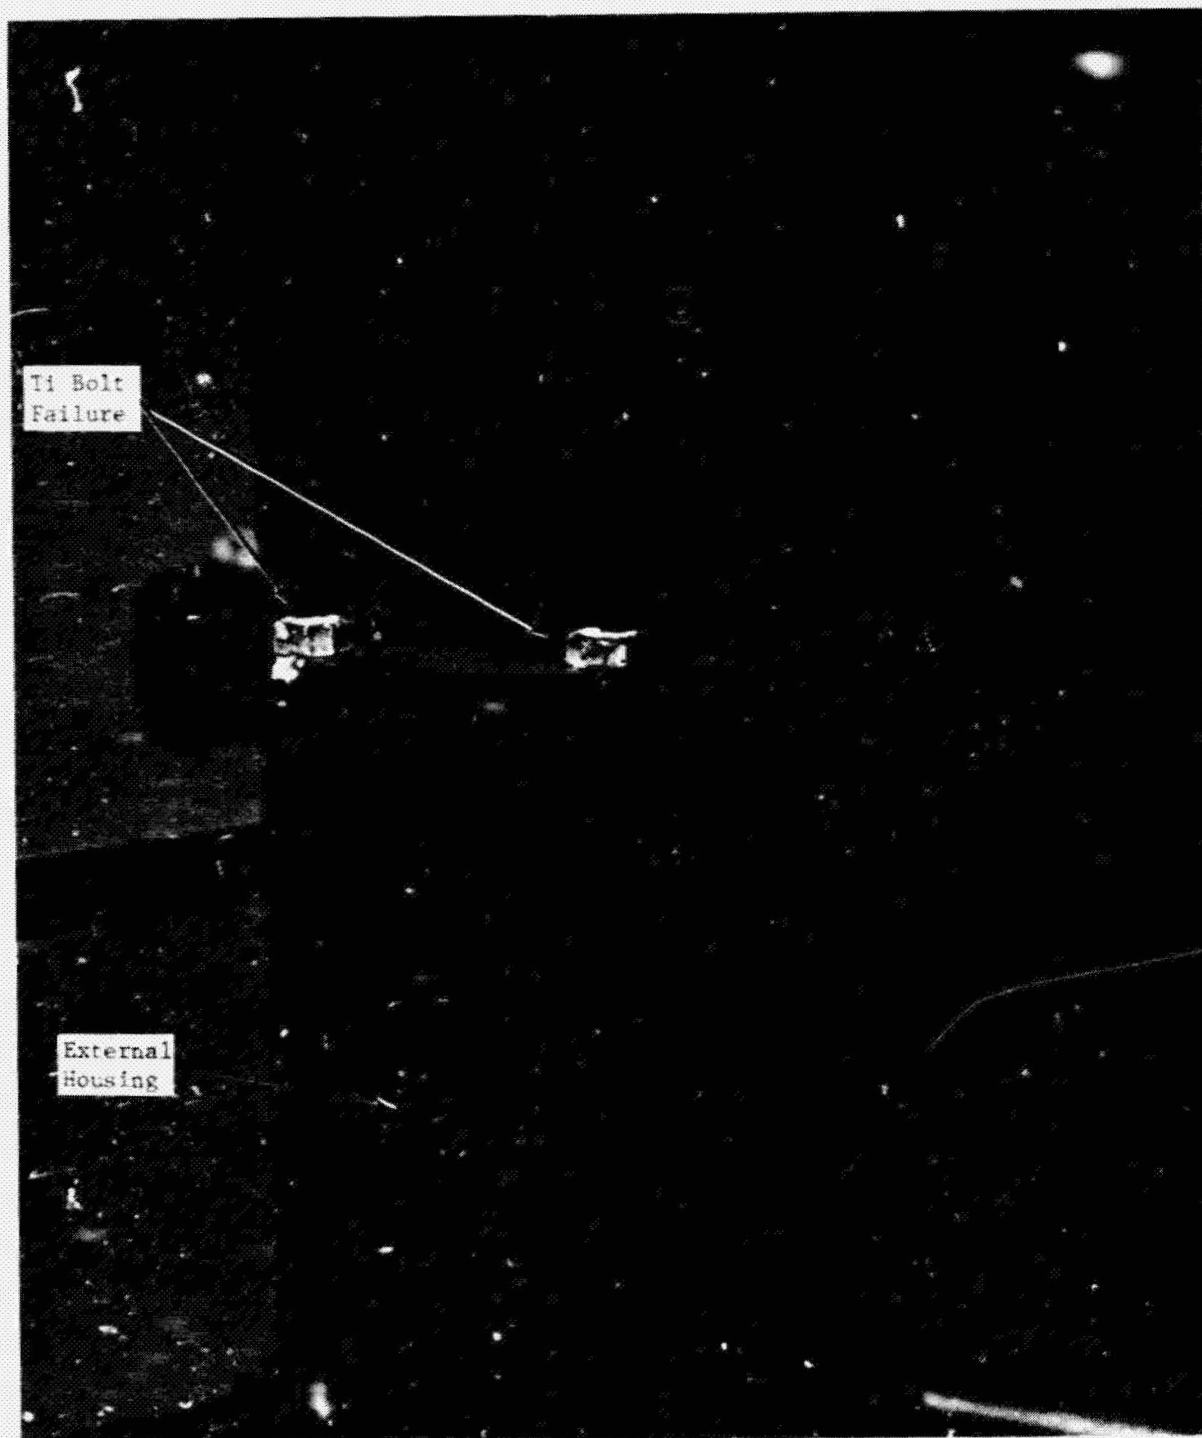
FCEM T1 BOLT FAILURE
